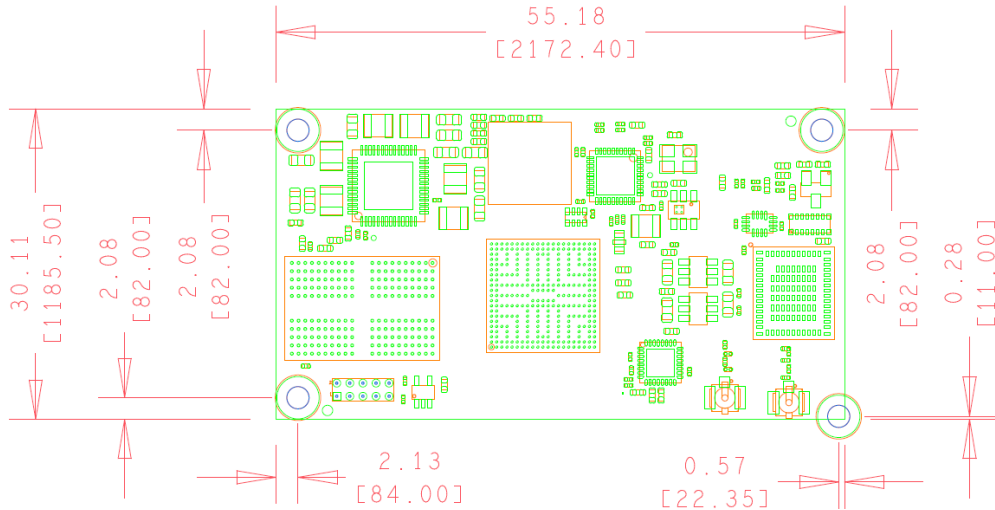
DART-MX93 Component Side Mechanics (Top view)
